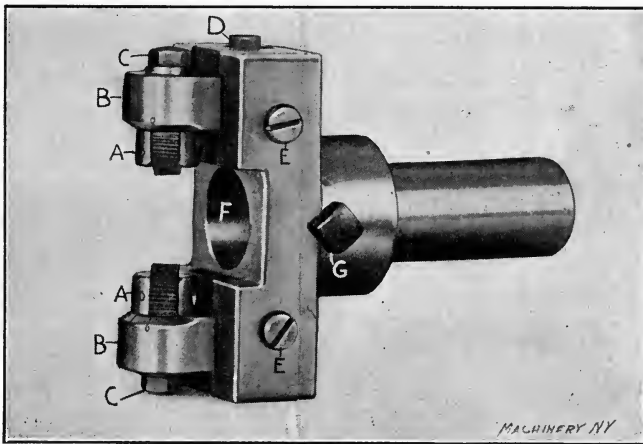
Brown & Sharpe Adjustable Turret Knurl-holder
